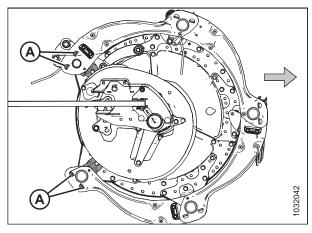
Reel Endshield Removed – Outboard Cam End
